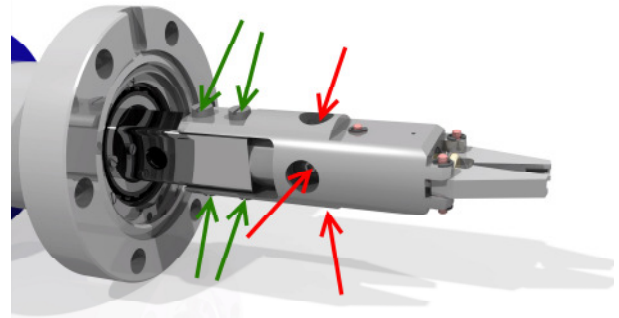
RMD40 with rear ball bearing and front ball bearing cage
